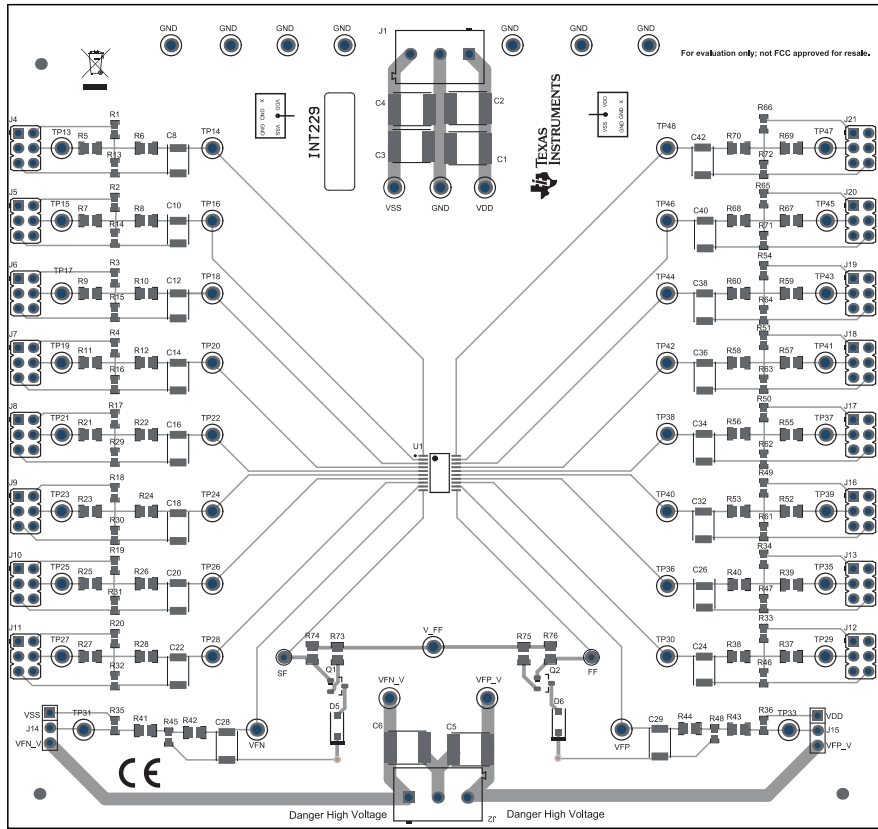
TMUX73XXF-EVM Top Layer Layout
